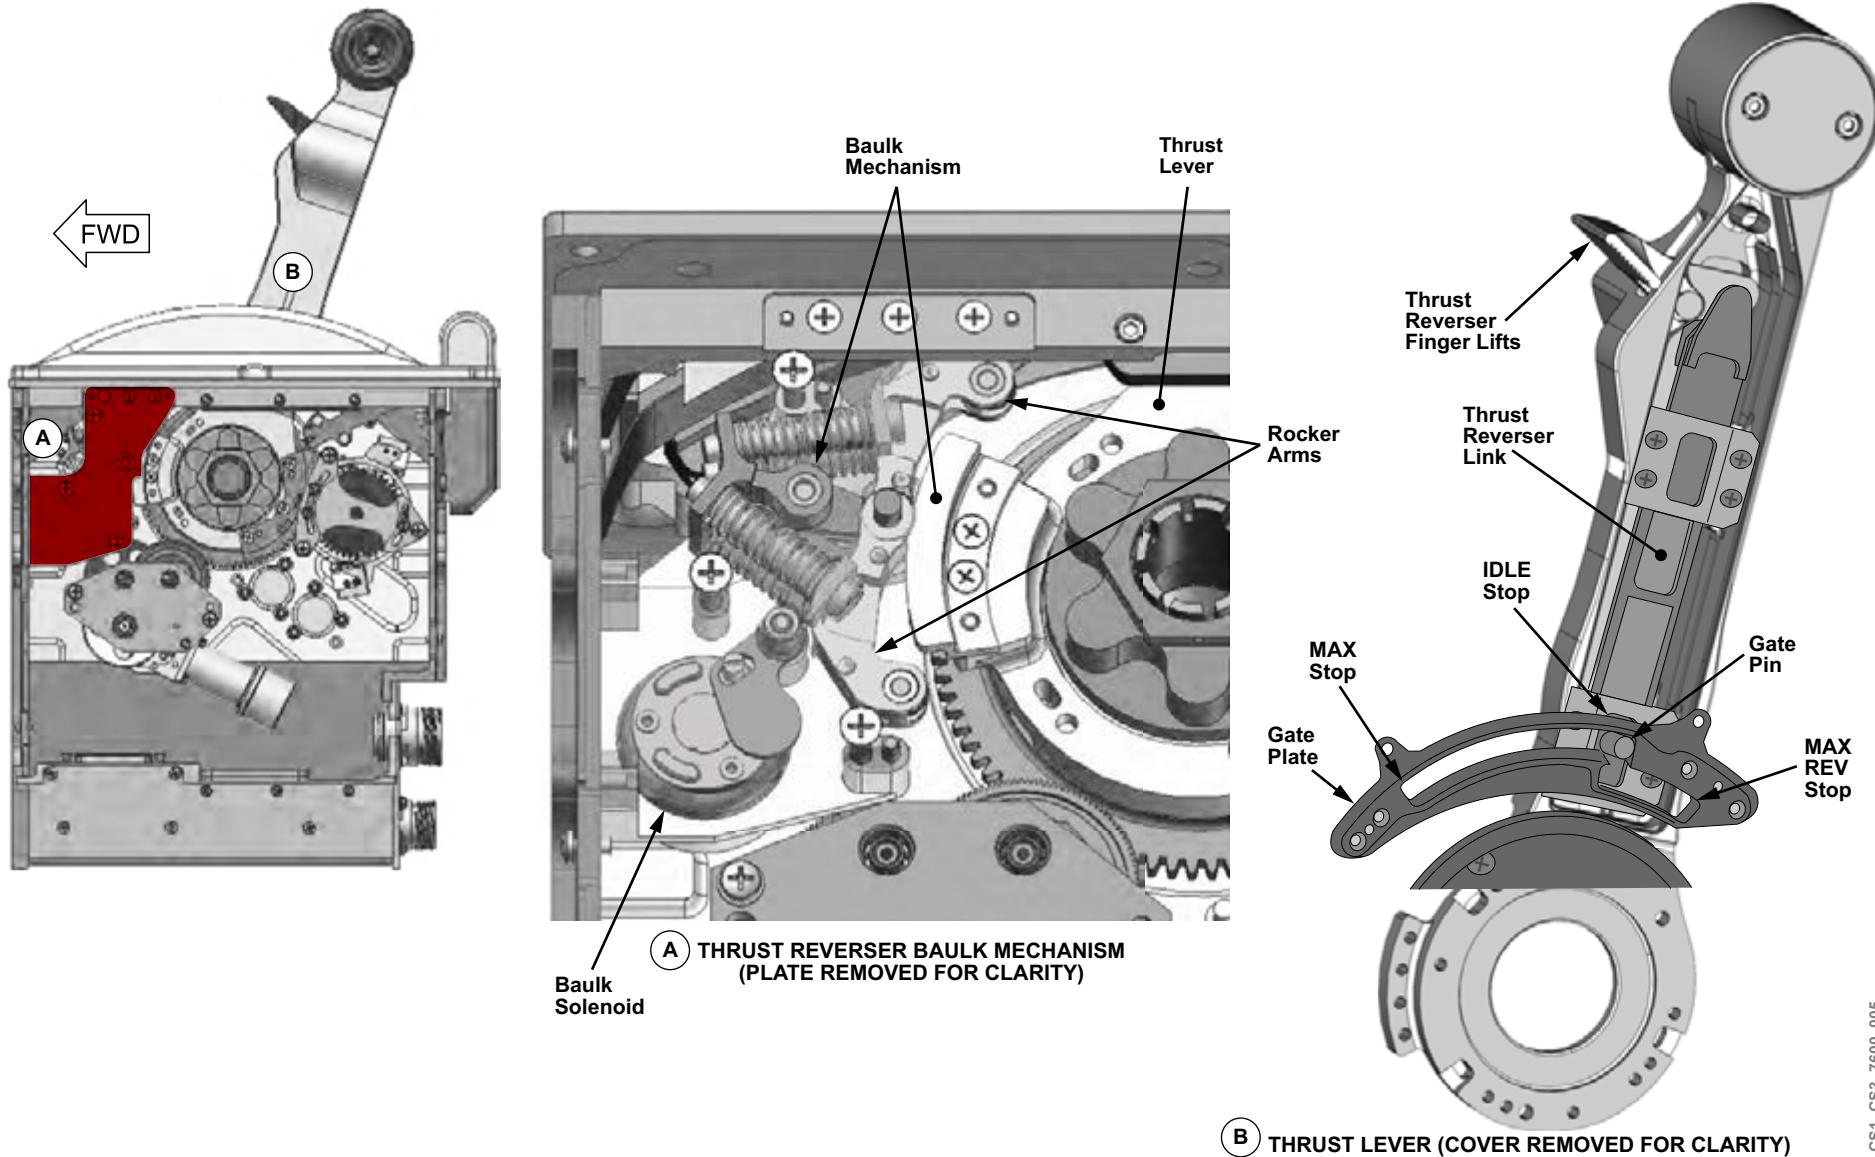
Throttle Quadrant Assembly Thrust Lever Control
